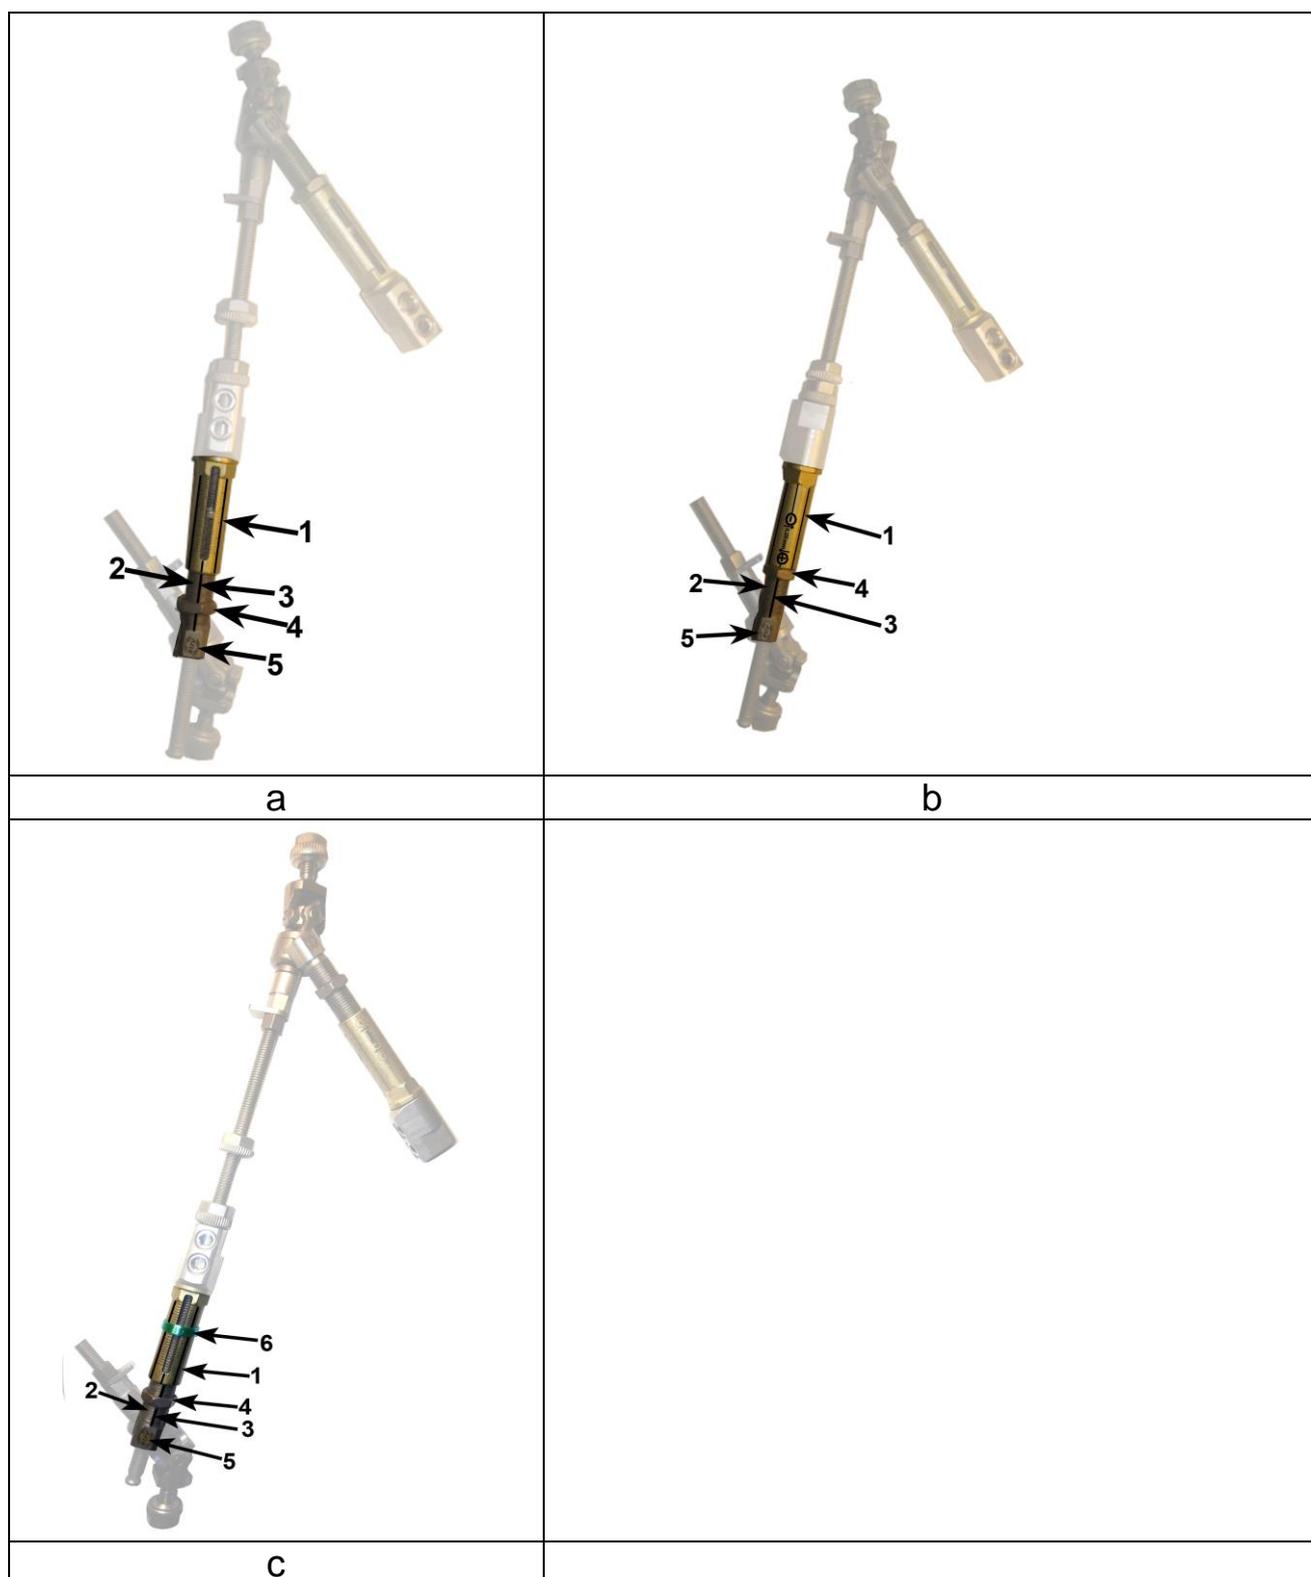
Clutch of strut length changing unit. a – view in coronal plane, lock-nut is moved away from external cylinder. b – view in sagittal plane, lock-nut fixes the external cylinder. 1 - the external cylinder with the scale, arrows "+" and "-", and eight longitudinal lines; 2 - internal cylinder; 3 - longitudinal line of internal cylinder; 4 – lock-nut; 5 - "SUV" logo;
